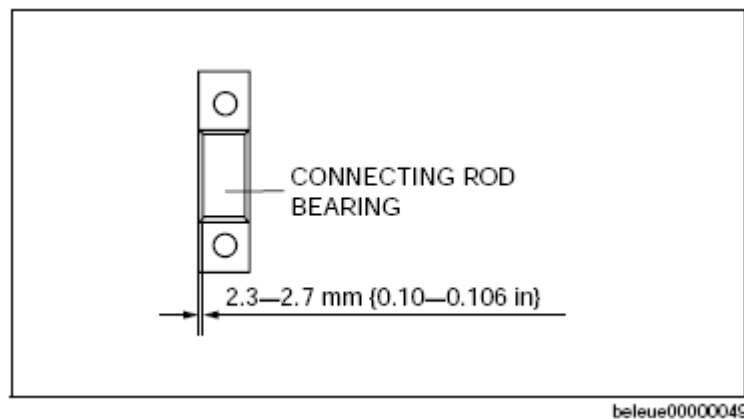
Installing Connecting Rod Bearing To Connecting Rod And Connecting Rod Caps
